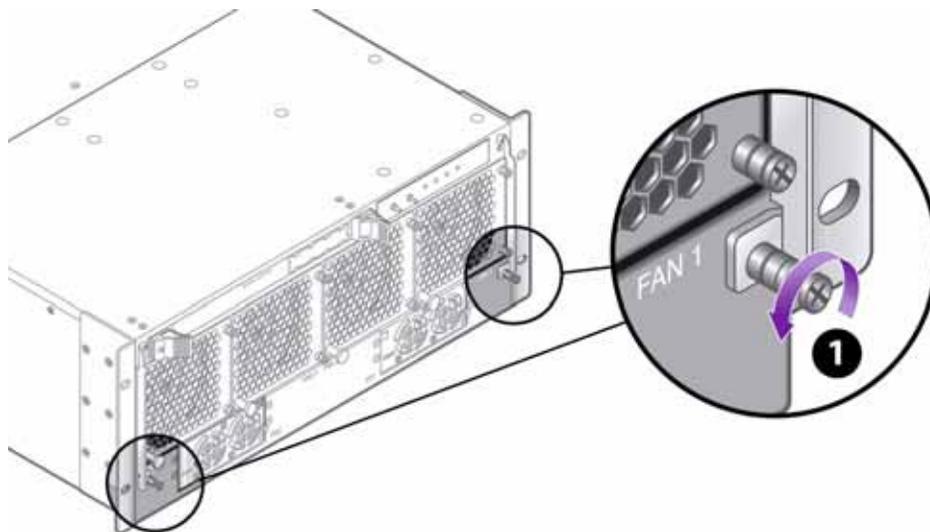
Loosening the VP780 Front Panel Assembly Screws
